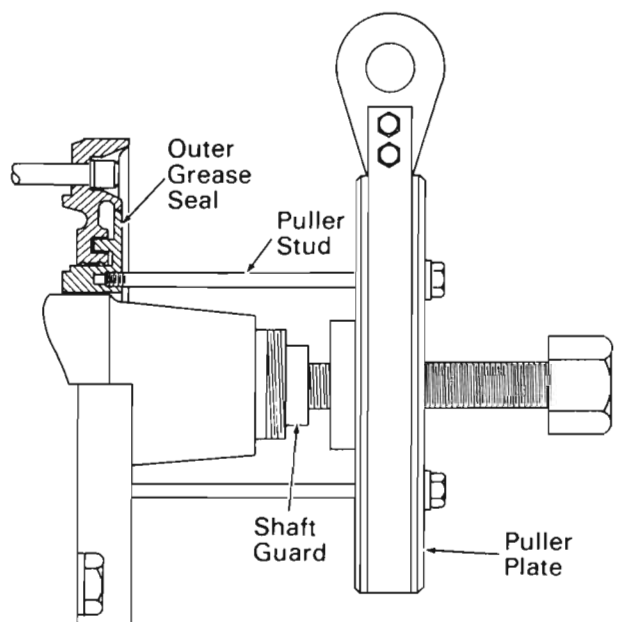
Removing Commutator End Bearing Rollers And Bearing Outer Race
